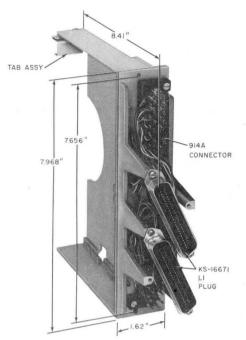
69D or 69G Apparatus Mounting (Without Guide Assembly)
